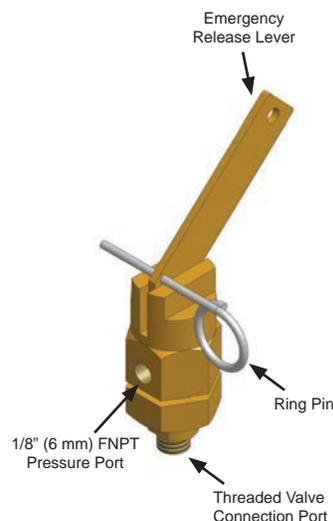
Lever-Pull Manual Valve Actuator
